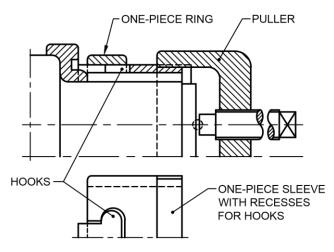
PULLER FOR NEEDLE-ROLLER BEARINGS
